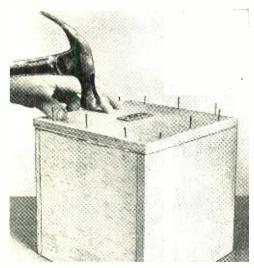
Mount screw-type terminal strip to rear of cabinet; then glue and nail rear wall to cabinet shell, trueing up sides, top, and bottom as you go.
